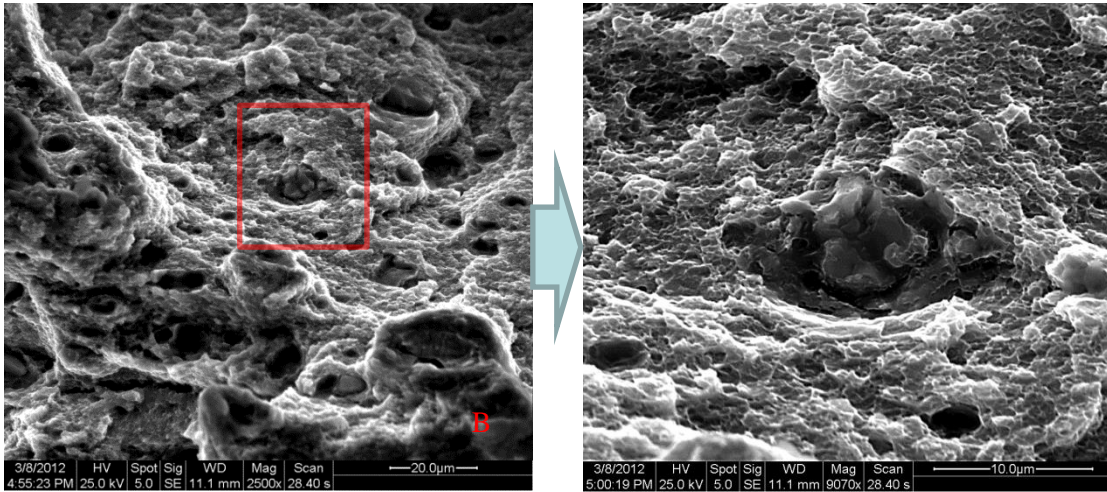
#3764 fracture surface structure just below the worm hole defects in WNZ
